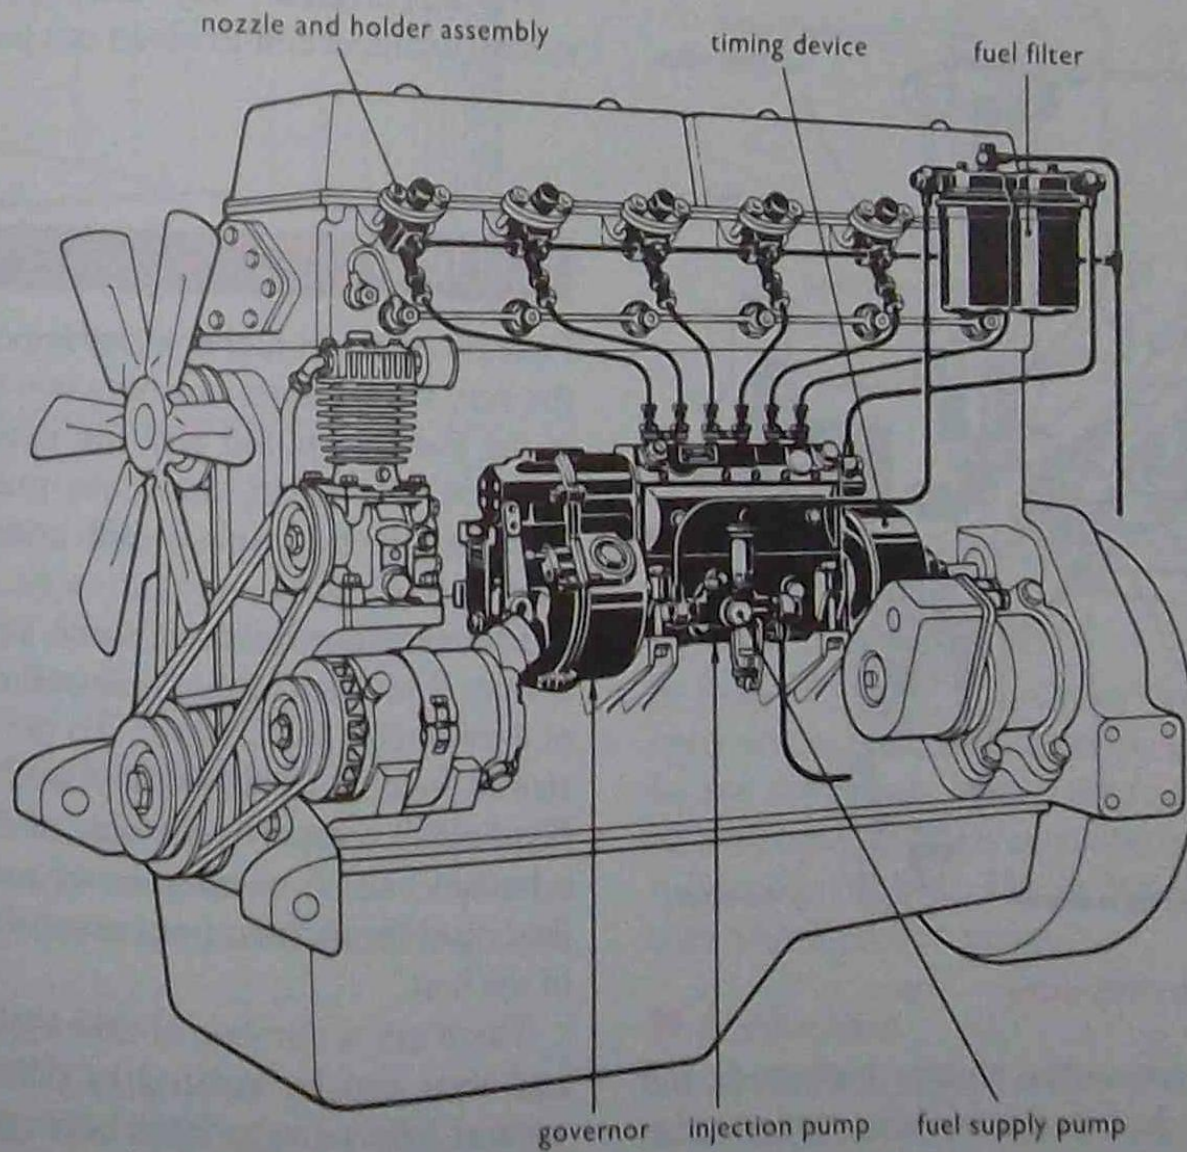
An in-line injection pump and other fuel system components installed on a commercial vehicle engine
